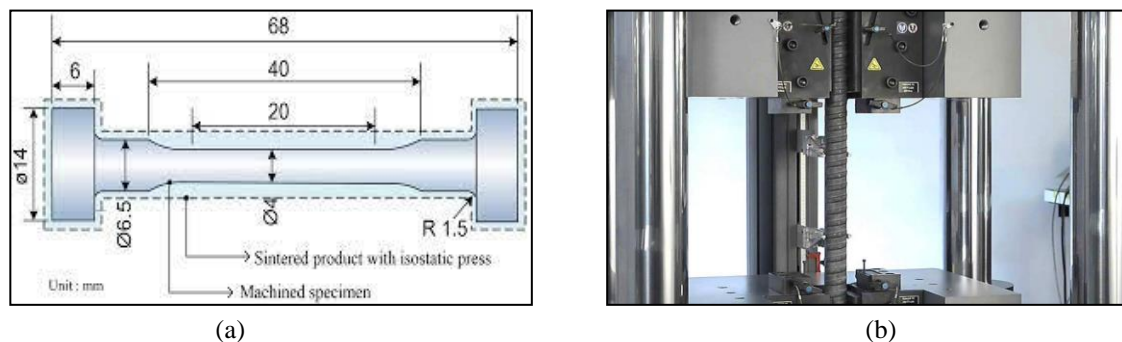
(a) Tensile specimen standard ;(b) Tensile testing machine(ASTM E8)
